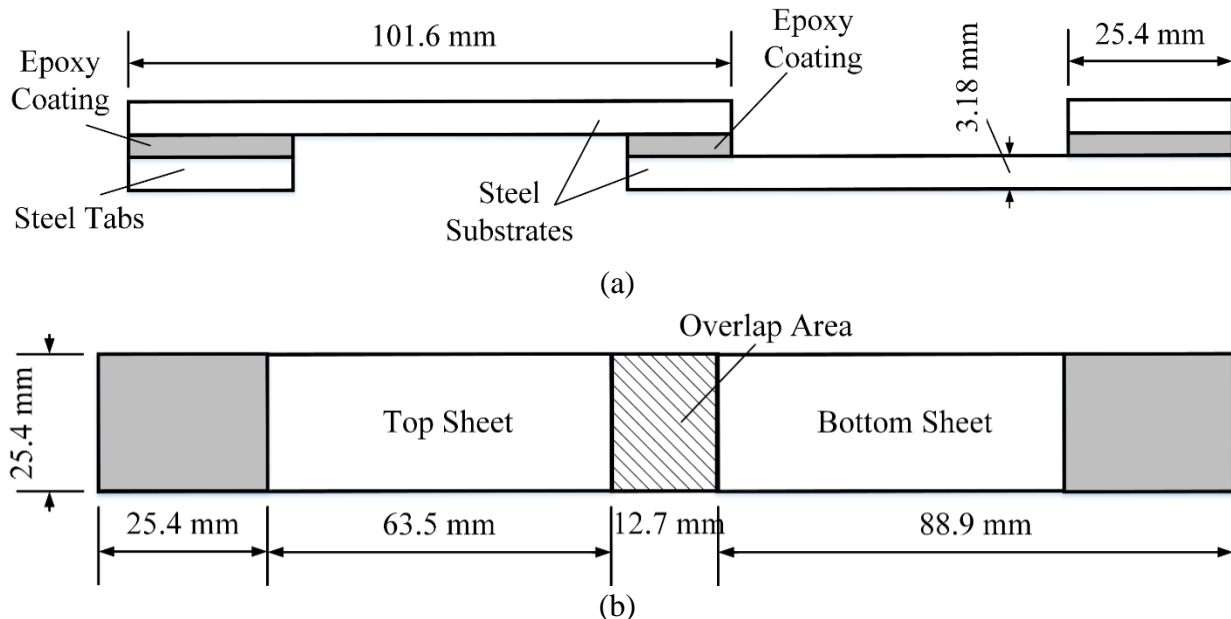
Detailed sample configurations: (a) cross-section view and (b) top view
